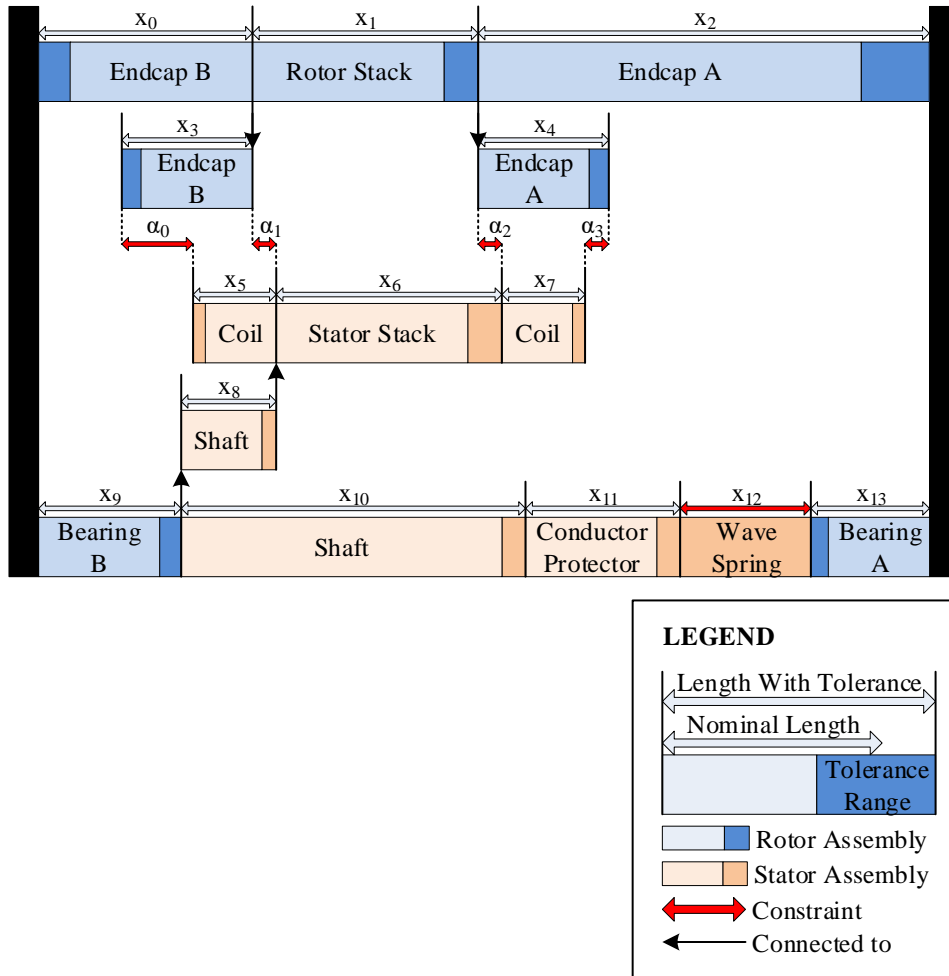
Axial tolerance stack-up (12/16 CSR motor prototype)
